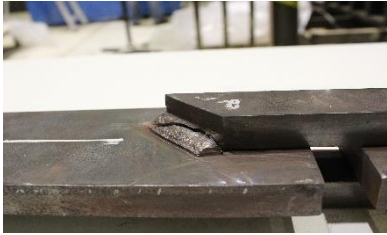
Failure modes for the inclined welded lap joints subjected to fast and slow loading rates
